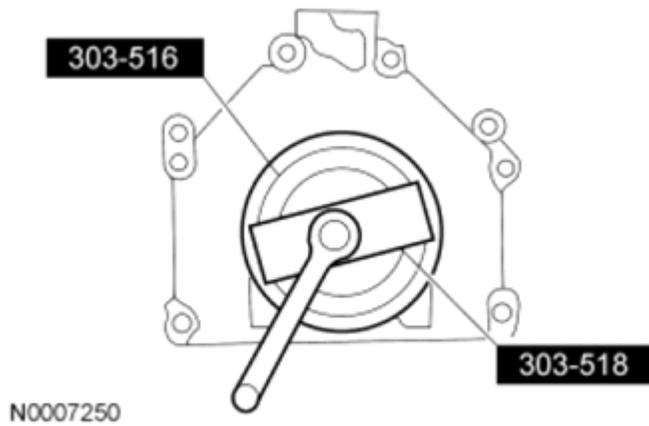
Installing Crankshaft Rear Oil Seal Using Special Tools
